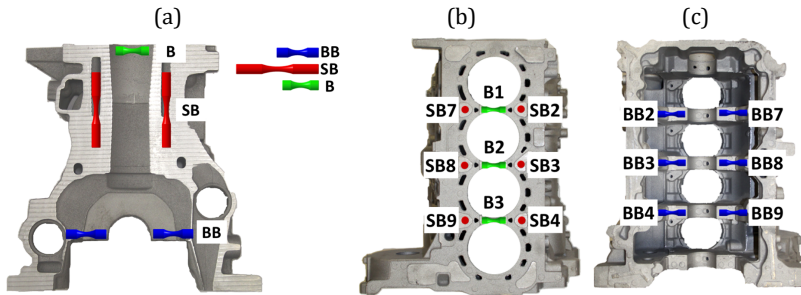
Locations of the specimen extraction positions within the crankcase casting in the sectioned (a), top (b), and bottom view (c): bridge “B”, bearing bracket “BB”, and stud bolt “SB” (216)
